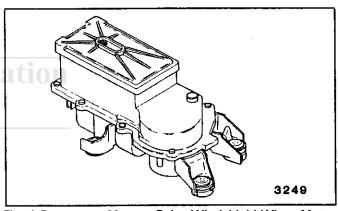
Permanent Magnet Pulse Windshield Wiper Motor
